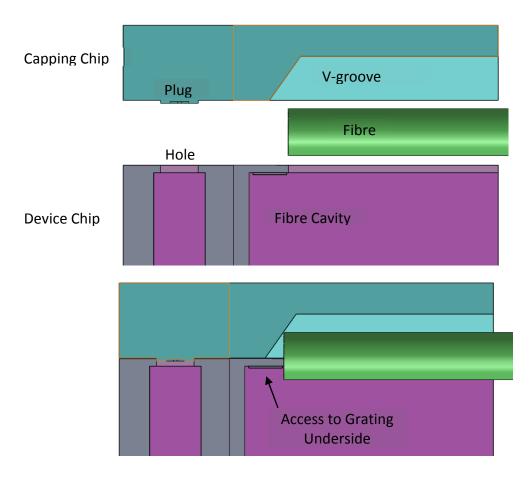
A cross section diagram of the packaging design in an exploded view (top) and assembled (bottom)
